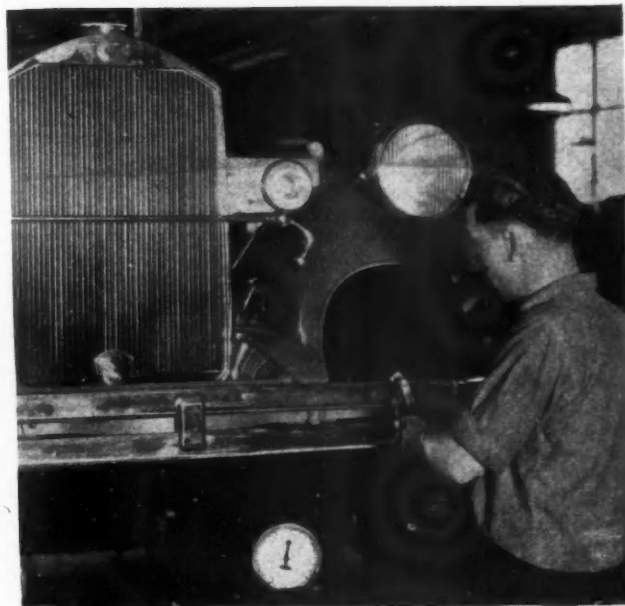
Gages are used in the Pierce-Arrow plant to check final brake adjustment
